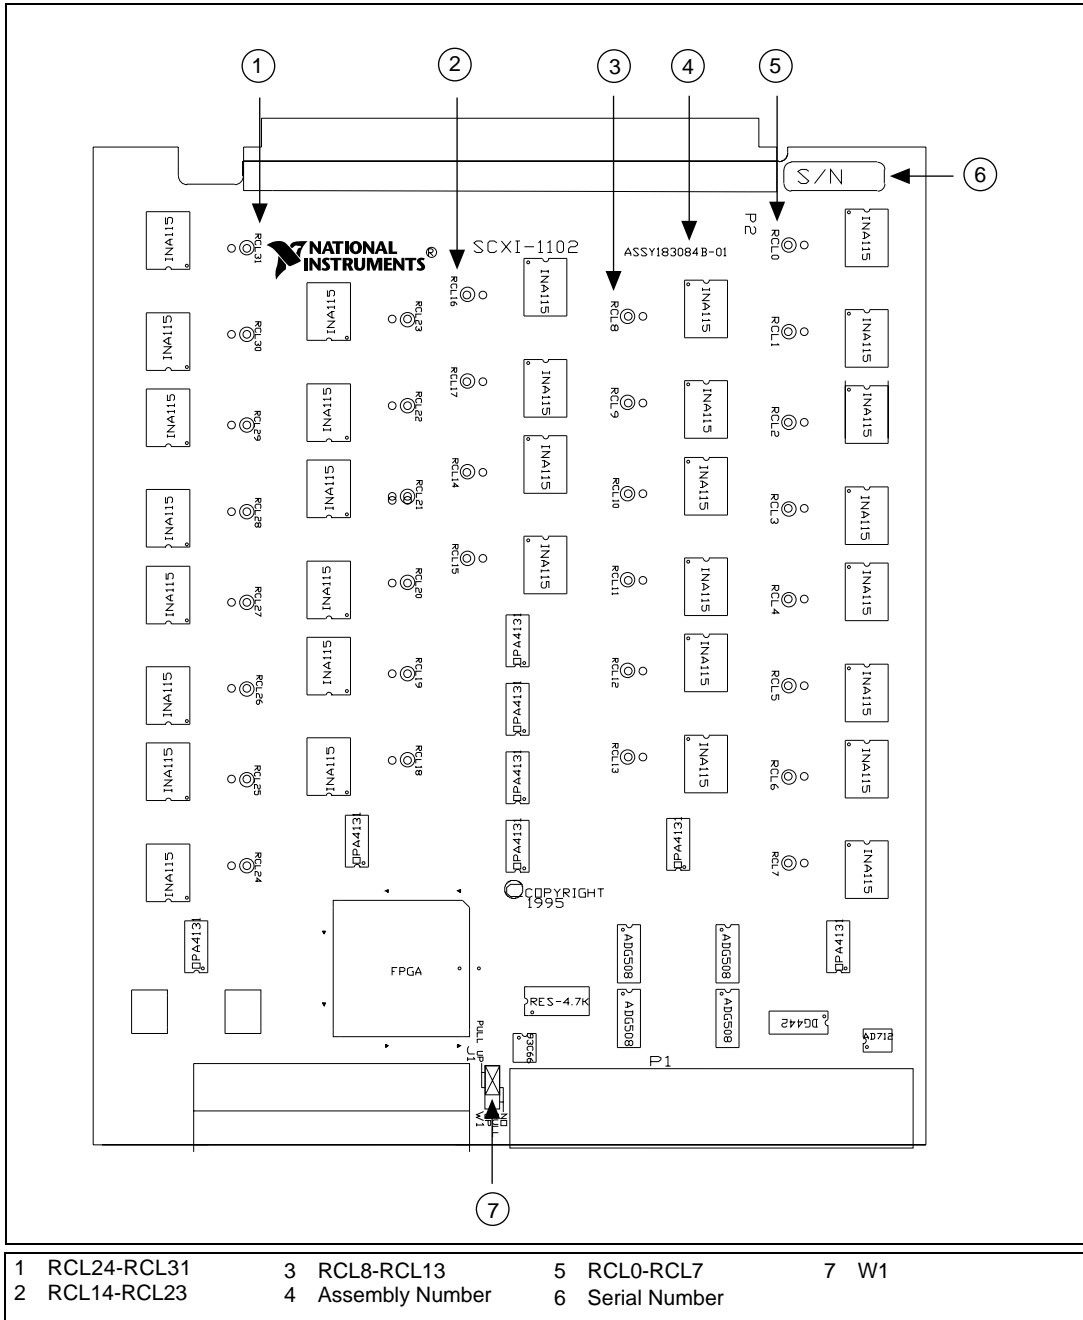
SCXI-1102/B/C Module Parts Locator Diagram (1102 shown)
